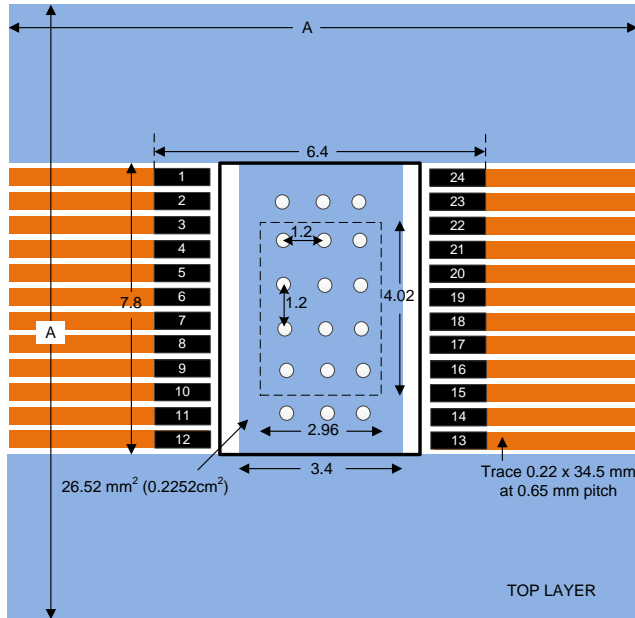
PCB - Top Layer (4/2-Layer PCB)
